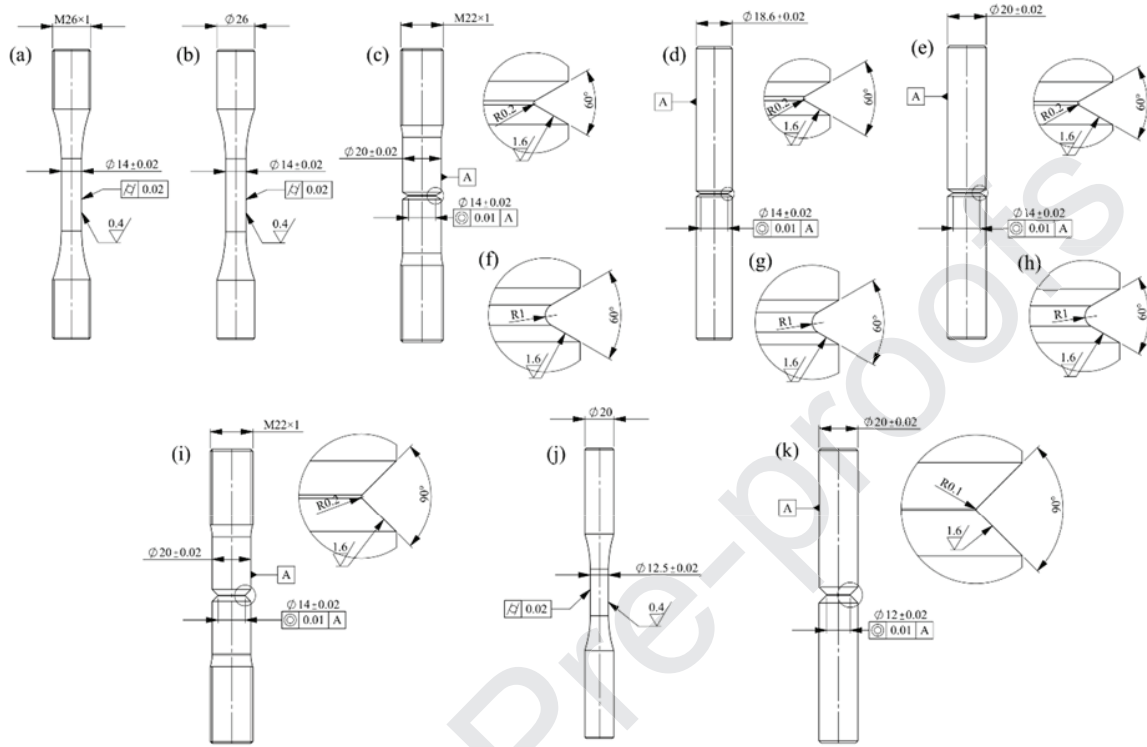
Technical drawings of the specimens exploited in the fatigue tests: (a) plain specimen for axial tests, (b) plain specimen for torsional and multiaxial tests, (c) V-notched specimen with sharp notch radius and opening angle $2\bar{\alpha}$ of 60° for axial tests, (d) V-notched specimen with sharp notch radius and opening angle $2\bar{\alpha}$ of 60° for torsional tests, (e) V-notched specimen with sharp notch radius and opening angle $2\bar{\alpha}$ of 60° for multiaxial tests, (f) V-notched specimen with blunt notch radius and opening angle $2\bar{\alpha}$ of 60° for axial tests, (g) V-notched specimen with blunt notch radius and opening angle $2\bar{\alpha}$ of 60° for torsional tests, (h) V-notched specimen with blunt notch radius and opening angle $2\bar{\alpha}$ of 60° for multiaxial tests, (i) V-notched specimen with sharp notch radius and opening angle $2\bar{\alpha}$ of 90° for axial tests, (j) plain specimen for axial, torsional and multiaxial tests of the GJS-400 grade, and (k) V-notched specimen with sharp notch radius and opening angle $2\bar{\alpha}$ of 60° for axial, torsional and multiaxial tests of the GJS-400 grade.
